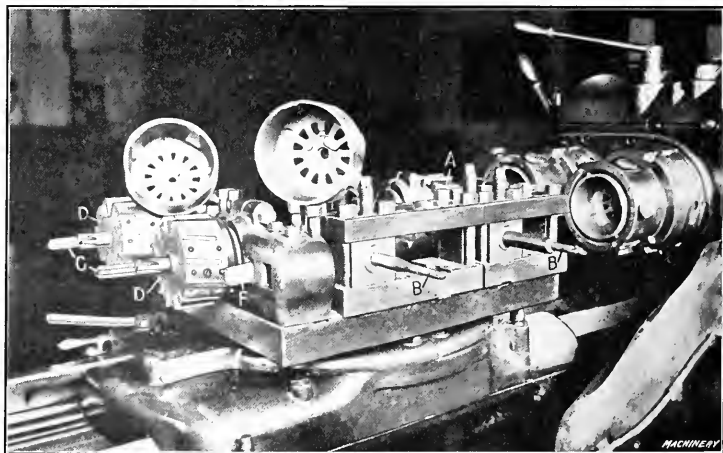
Close View of Jones & Lamson Double-spindle Flat Turret Lathe showing the Turret Tools, Chucks and Work
